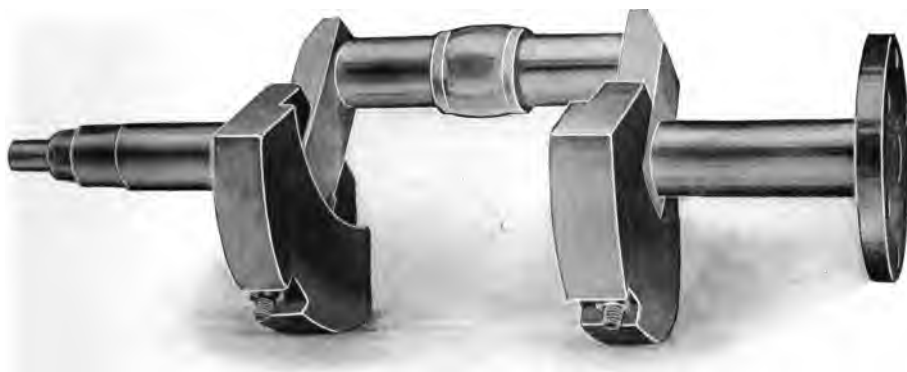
TWO-CYLINDER CRANK SHAFT, CRANK ON SAME THROW.
